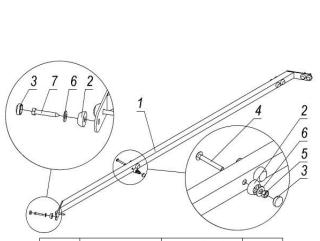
Completeness and assembly diagram of the undulating bridge assembly
